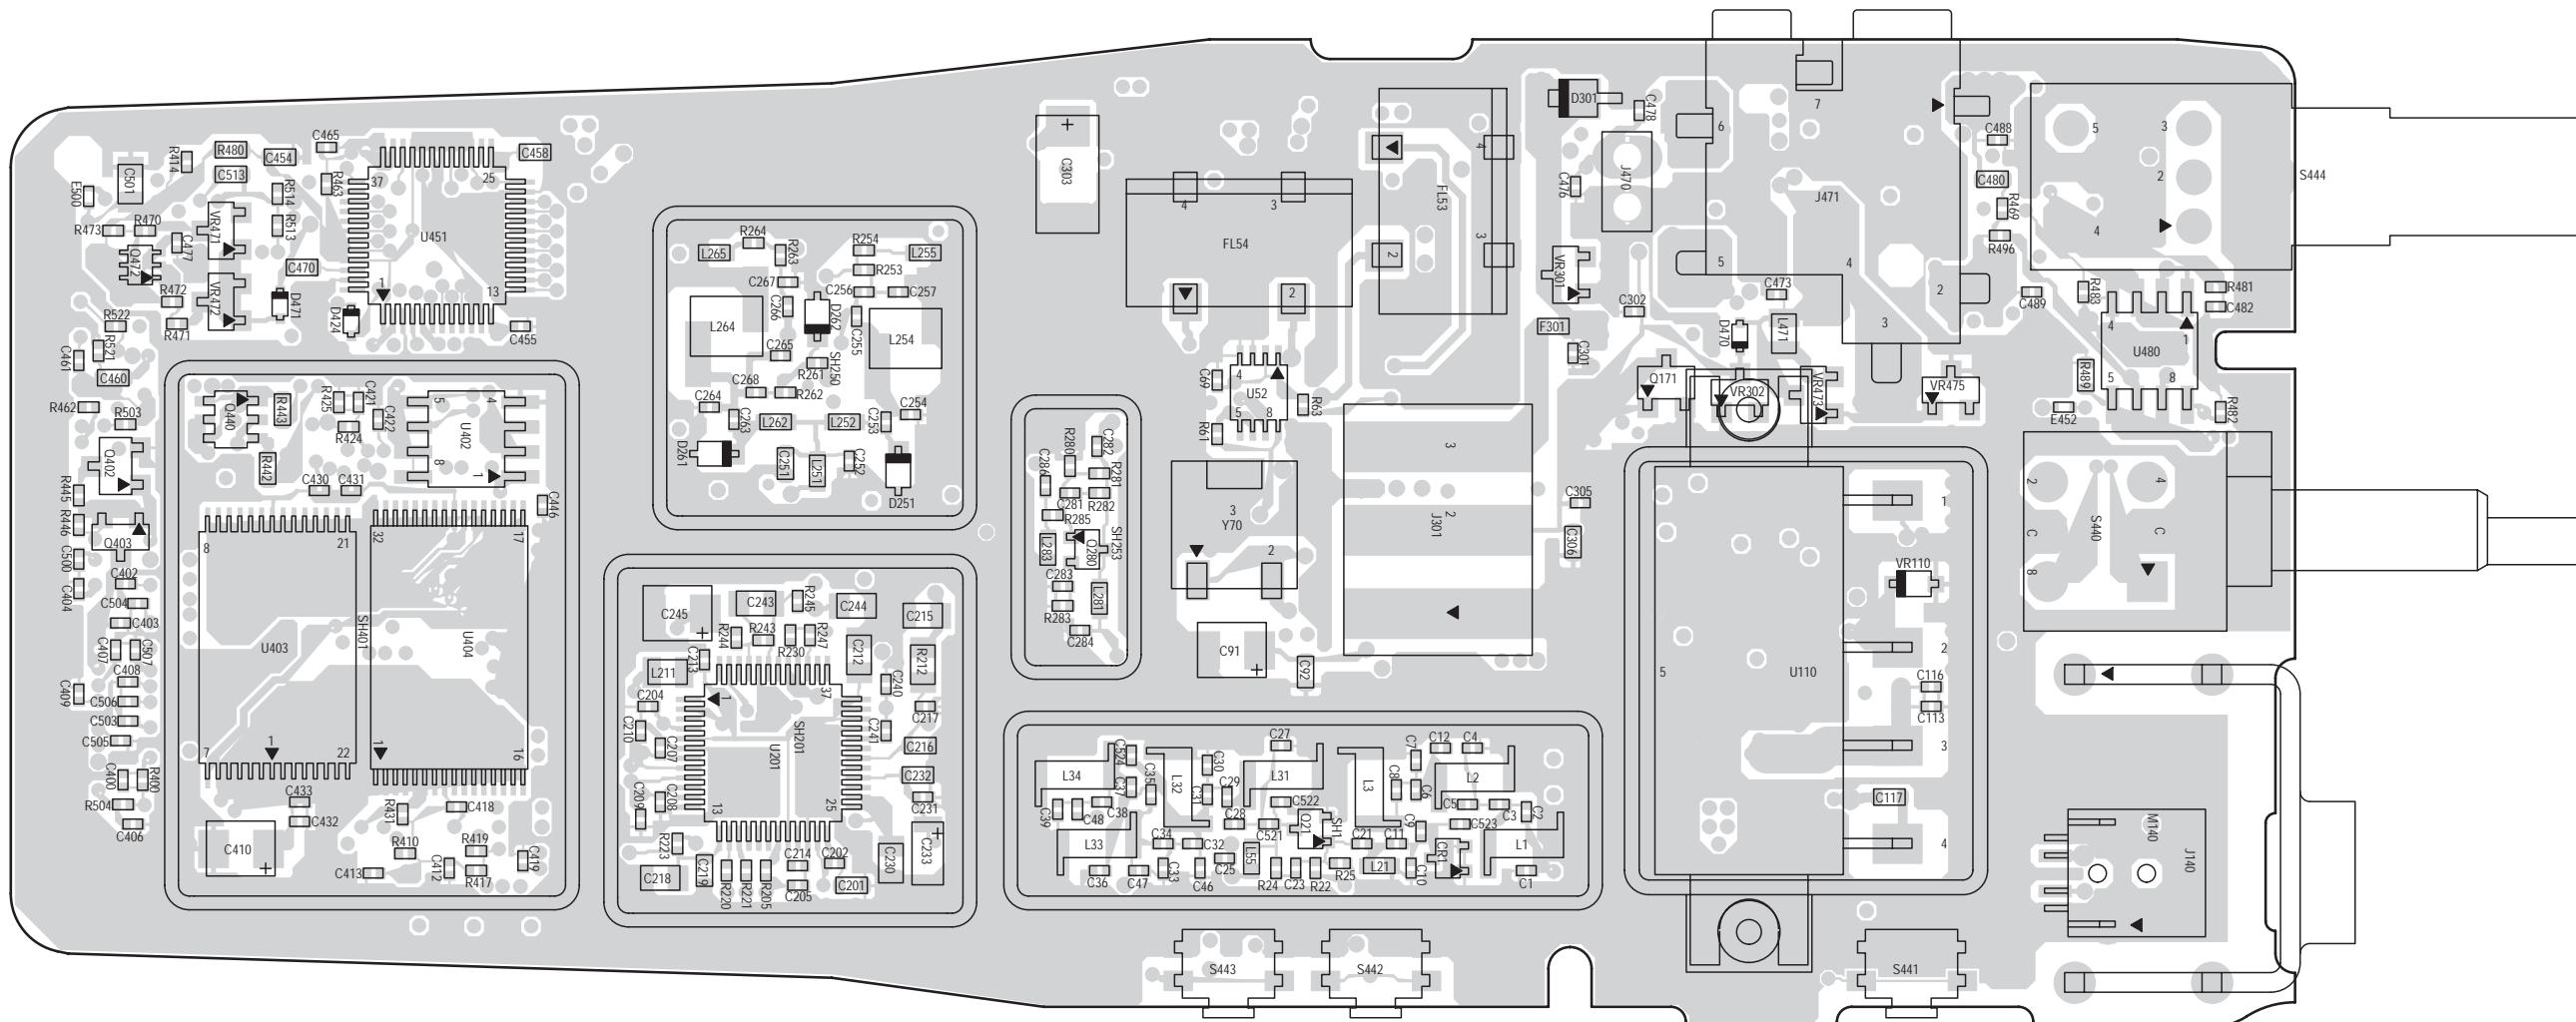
UHF (465-495 MHz) PCB8486634Z02-O Board Component Side View
